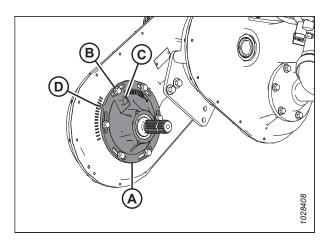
Completion Gearbox Chain Tensioner Cover
